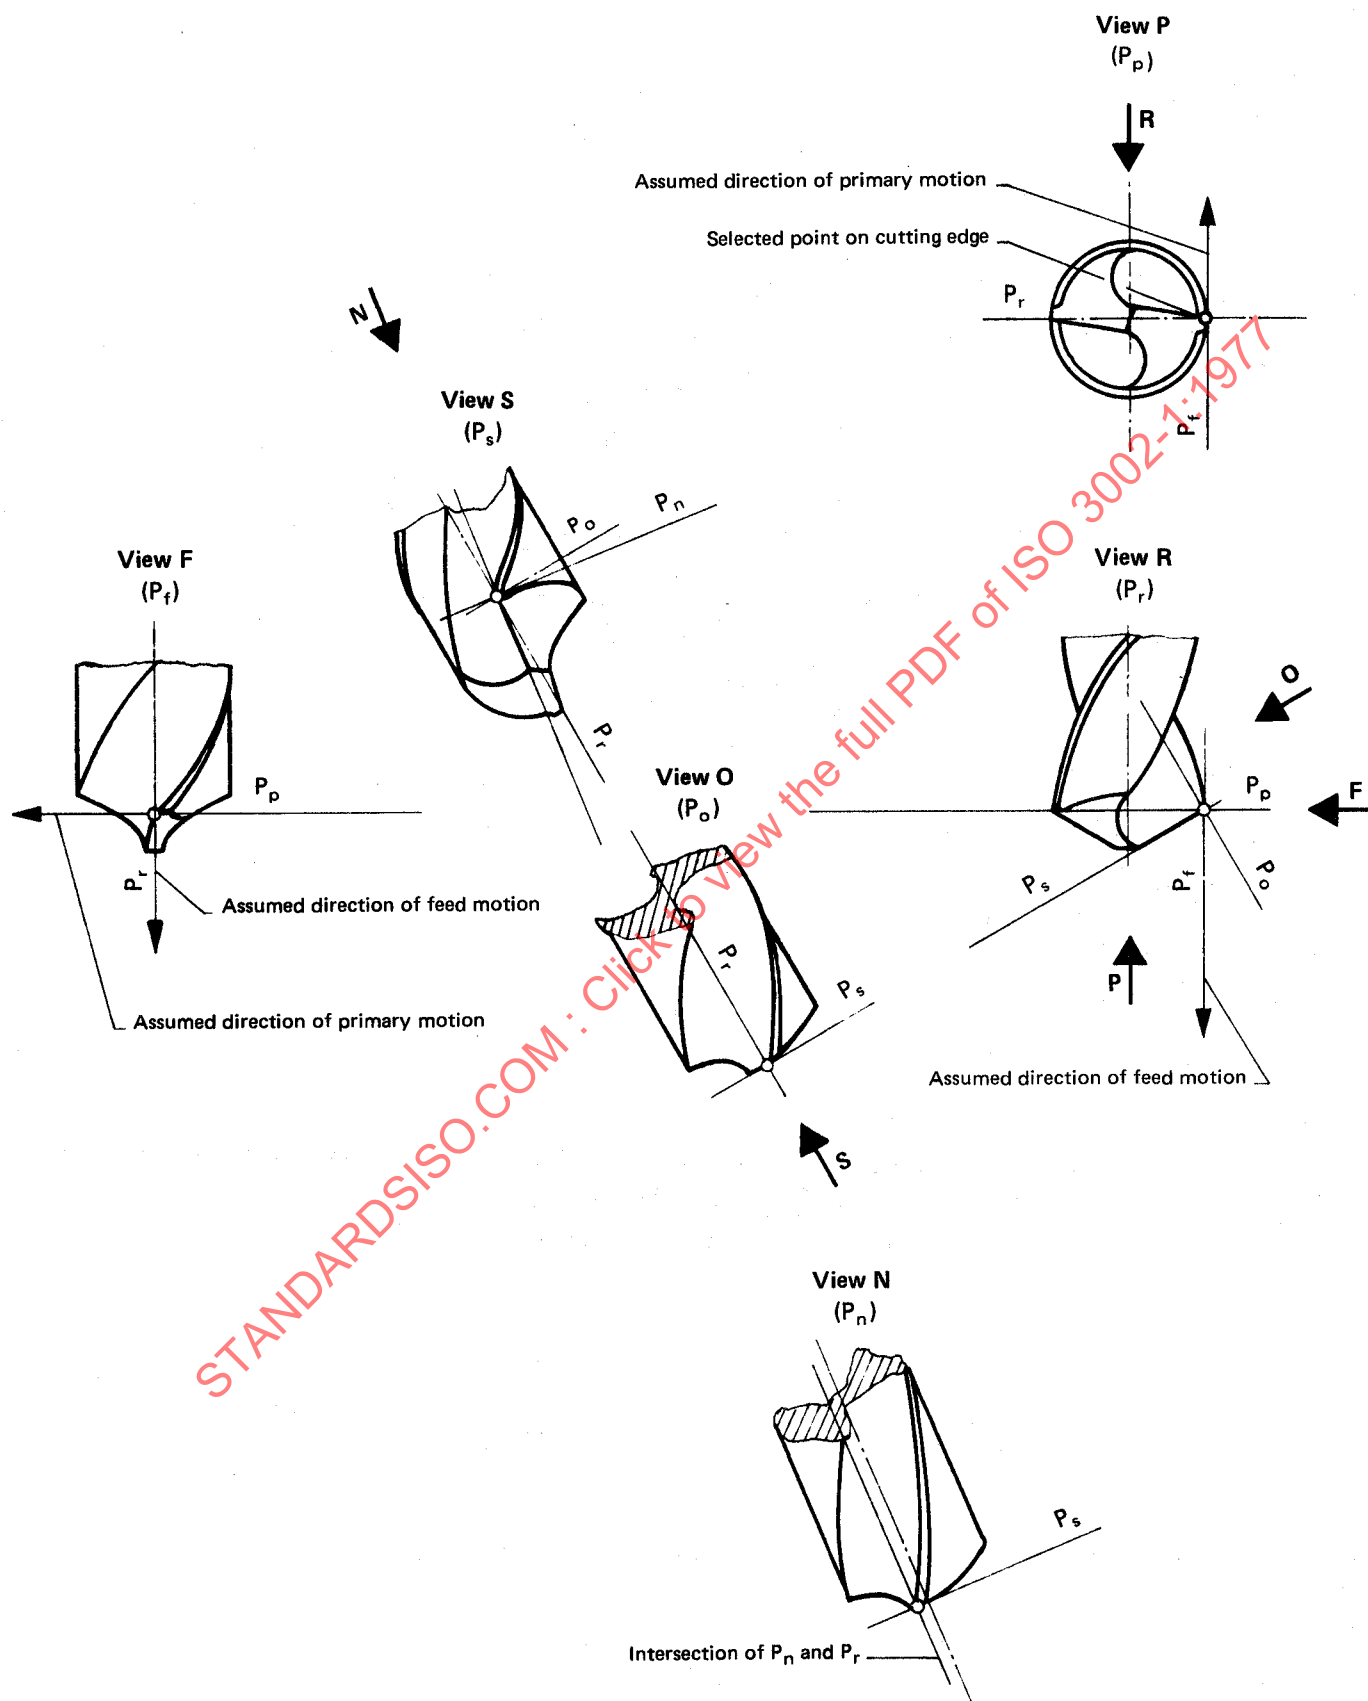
Planes in the tool-in-hand system — Twist drill
